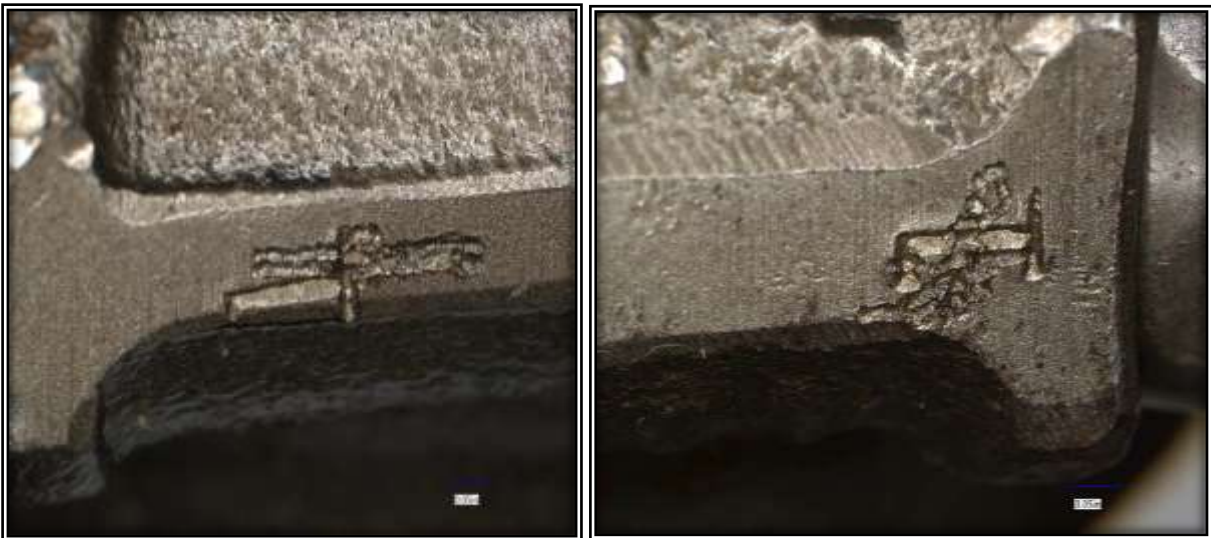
Both halves of the connecting rod assembly appear to have had their initial cylinder number (1) marking vibro opened over to resemble a 4. This indicates that this connecting rod is not the initial part.
